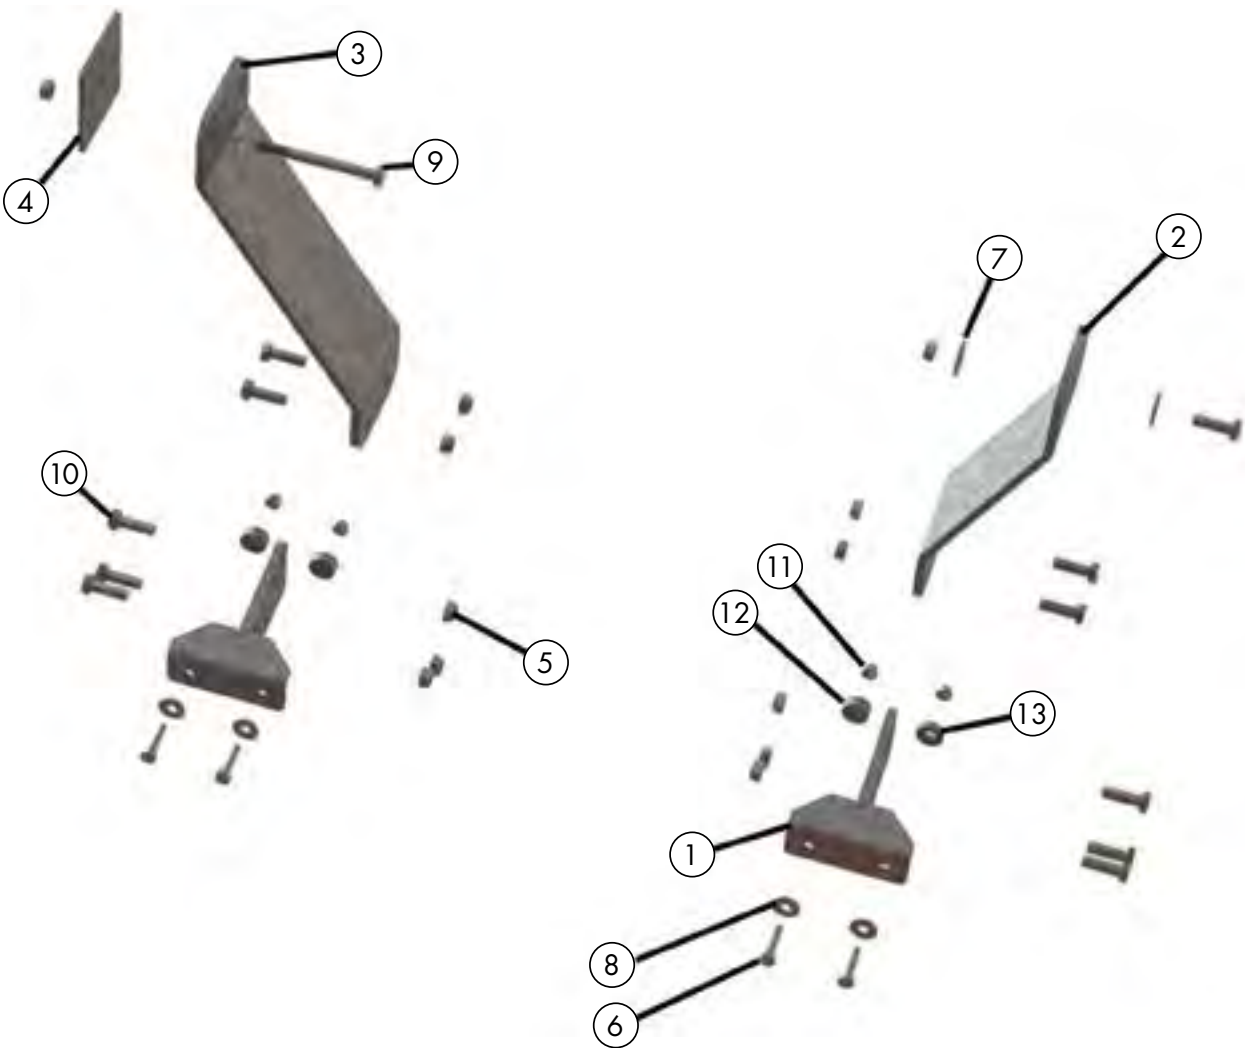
MOUNTING KIT FORD TRANSIT "EXPLOSION"
